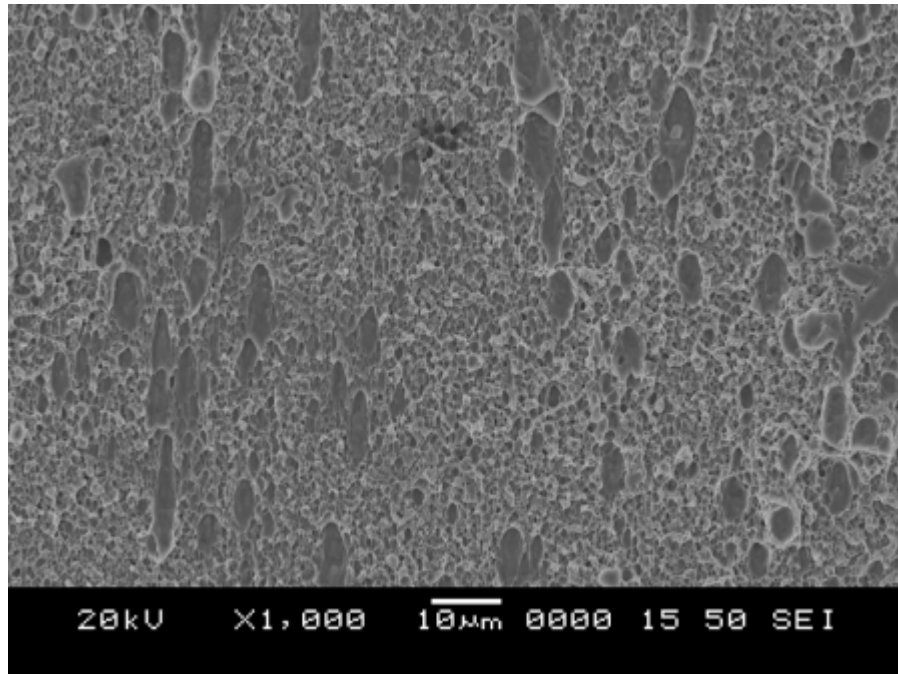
Tooth 31 fracture surface, showing cyclic overload fracture.
